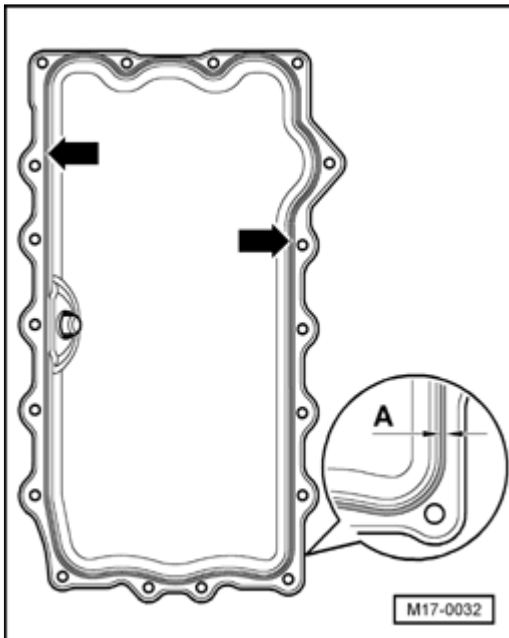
Identifying Silicone Path And Dimensions On Lower Part Of Oil Pan
